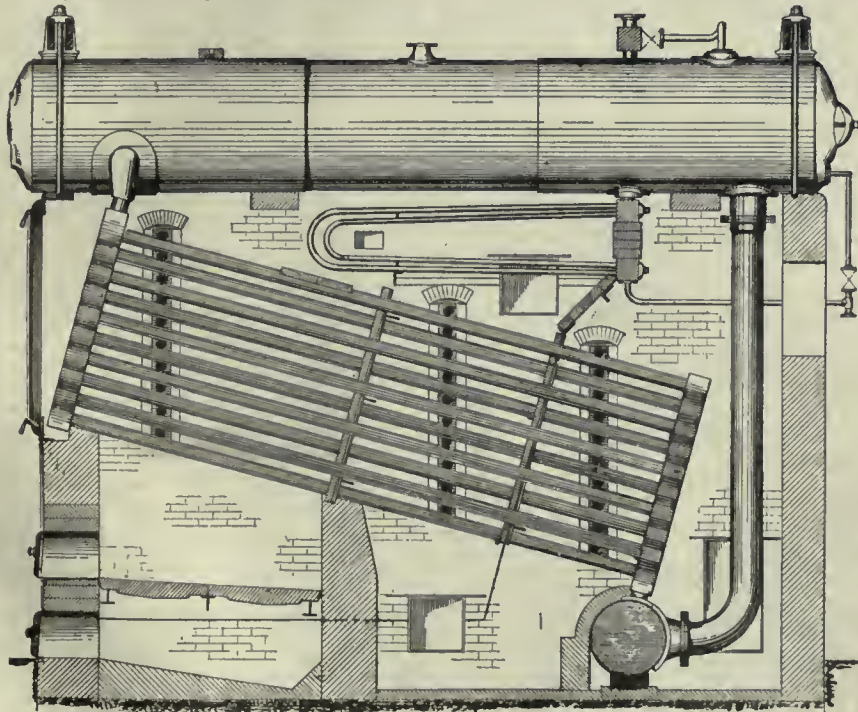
GOLDIE & McCULLOCH STANDARD SECTIONAL WATER TUBE BOILER.
